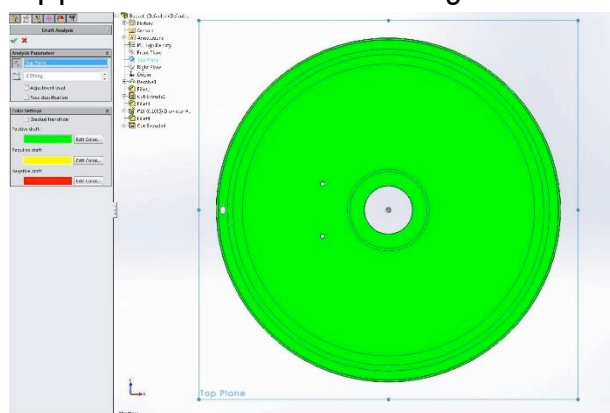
The reaction vessel can be molded in a 2-part mold. Draft analysis shows the reaction vessel has appropriate draft angle for molding
